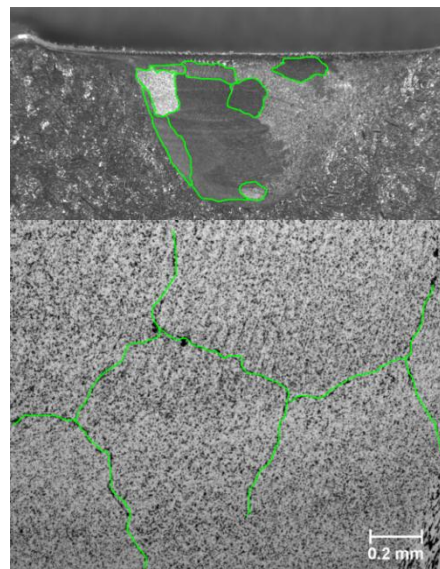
Weld nugget macrograph after PWHT, 1,500-RPM weld (top) and higher mag image (bottom).
